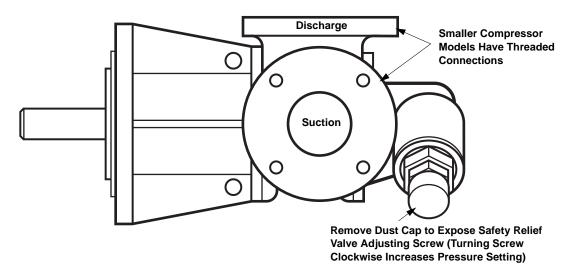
LUBE OIL PUMP - TYPICAL
